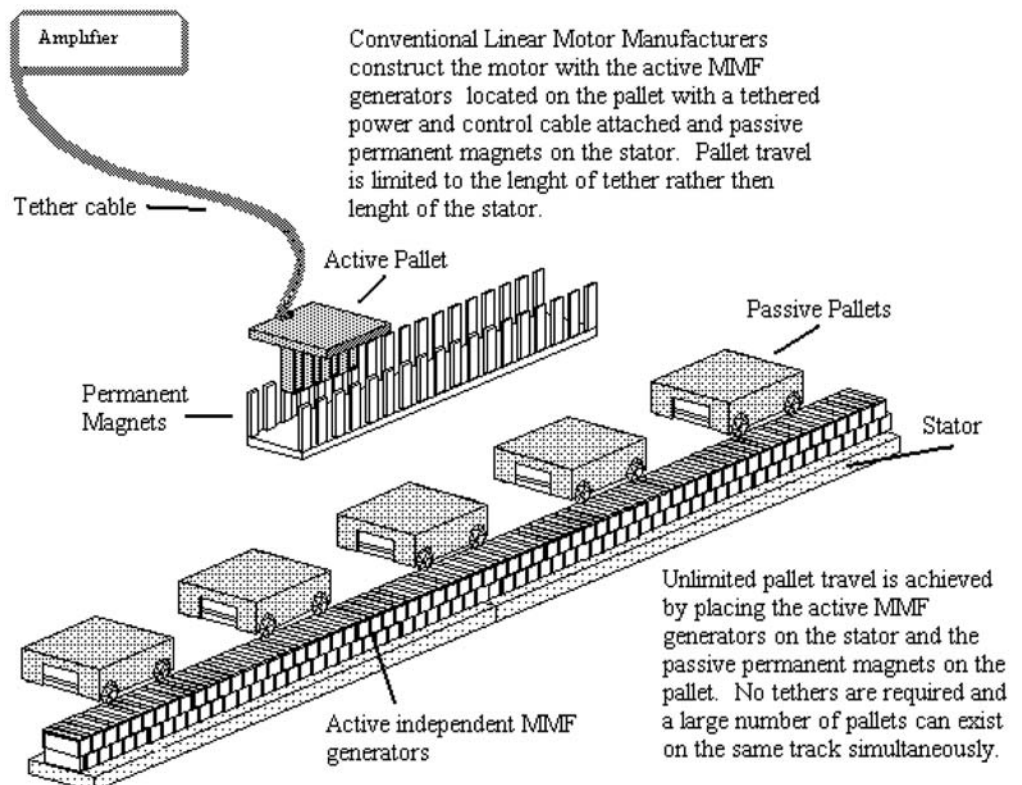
Traditional Linear Motor vs. Modular Linear Motor
